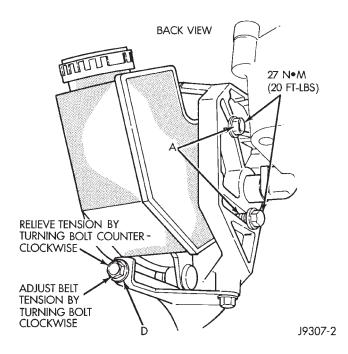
P.S. Pump Rear Mounting Bolts—Typical
